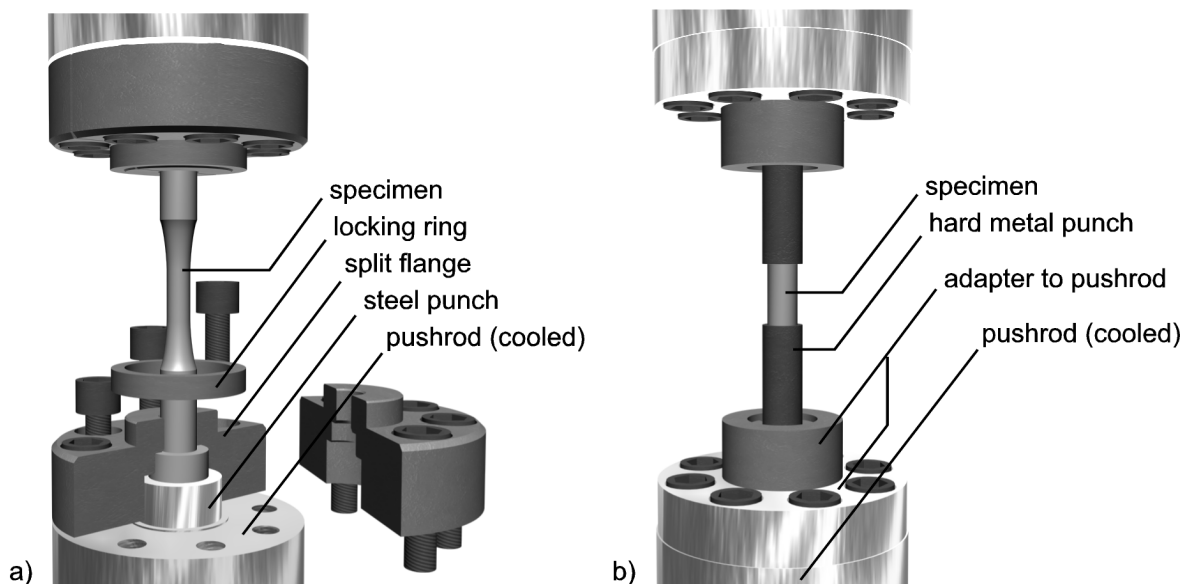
Grip assembly for a) tension-compression tests and b) compression only test
